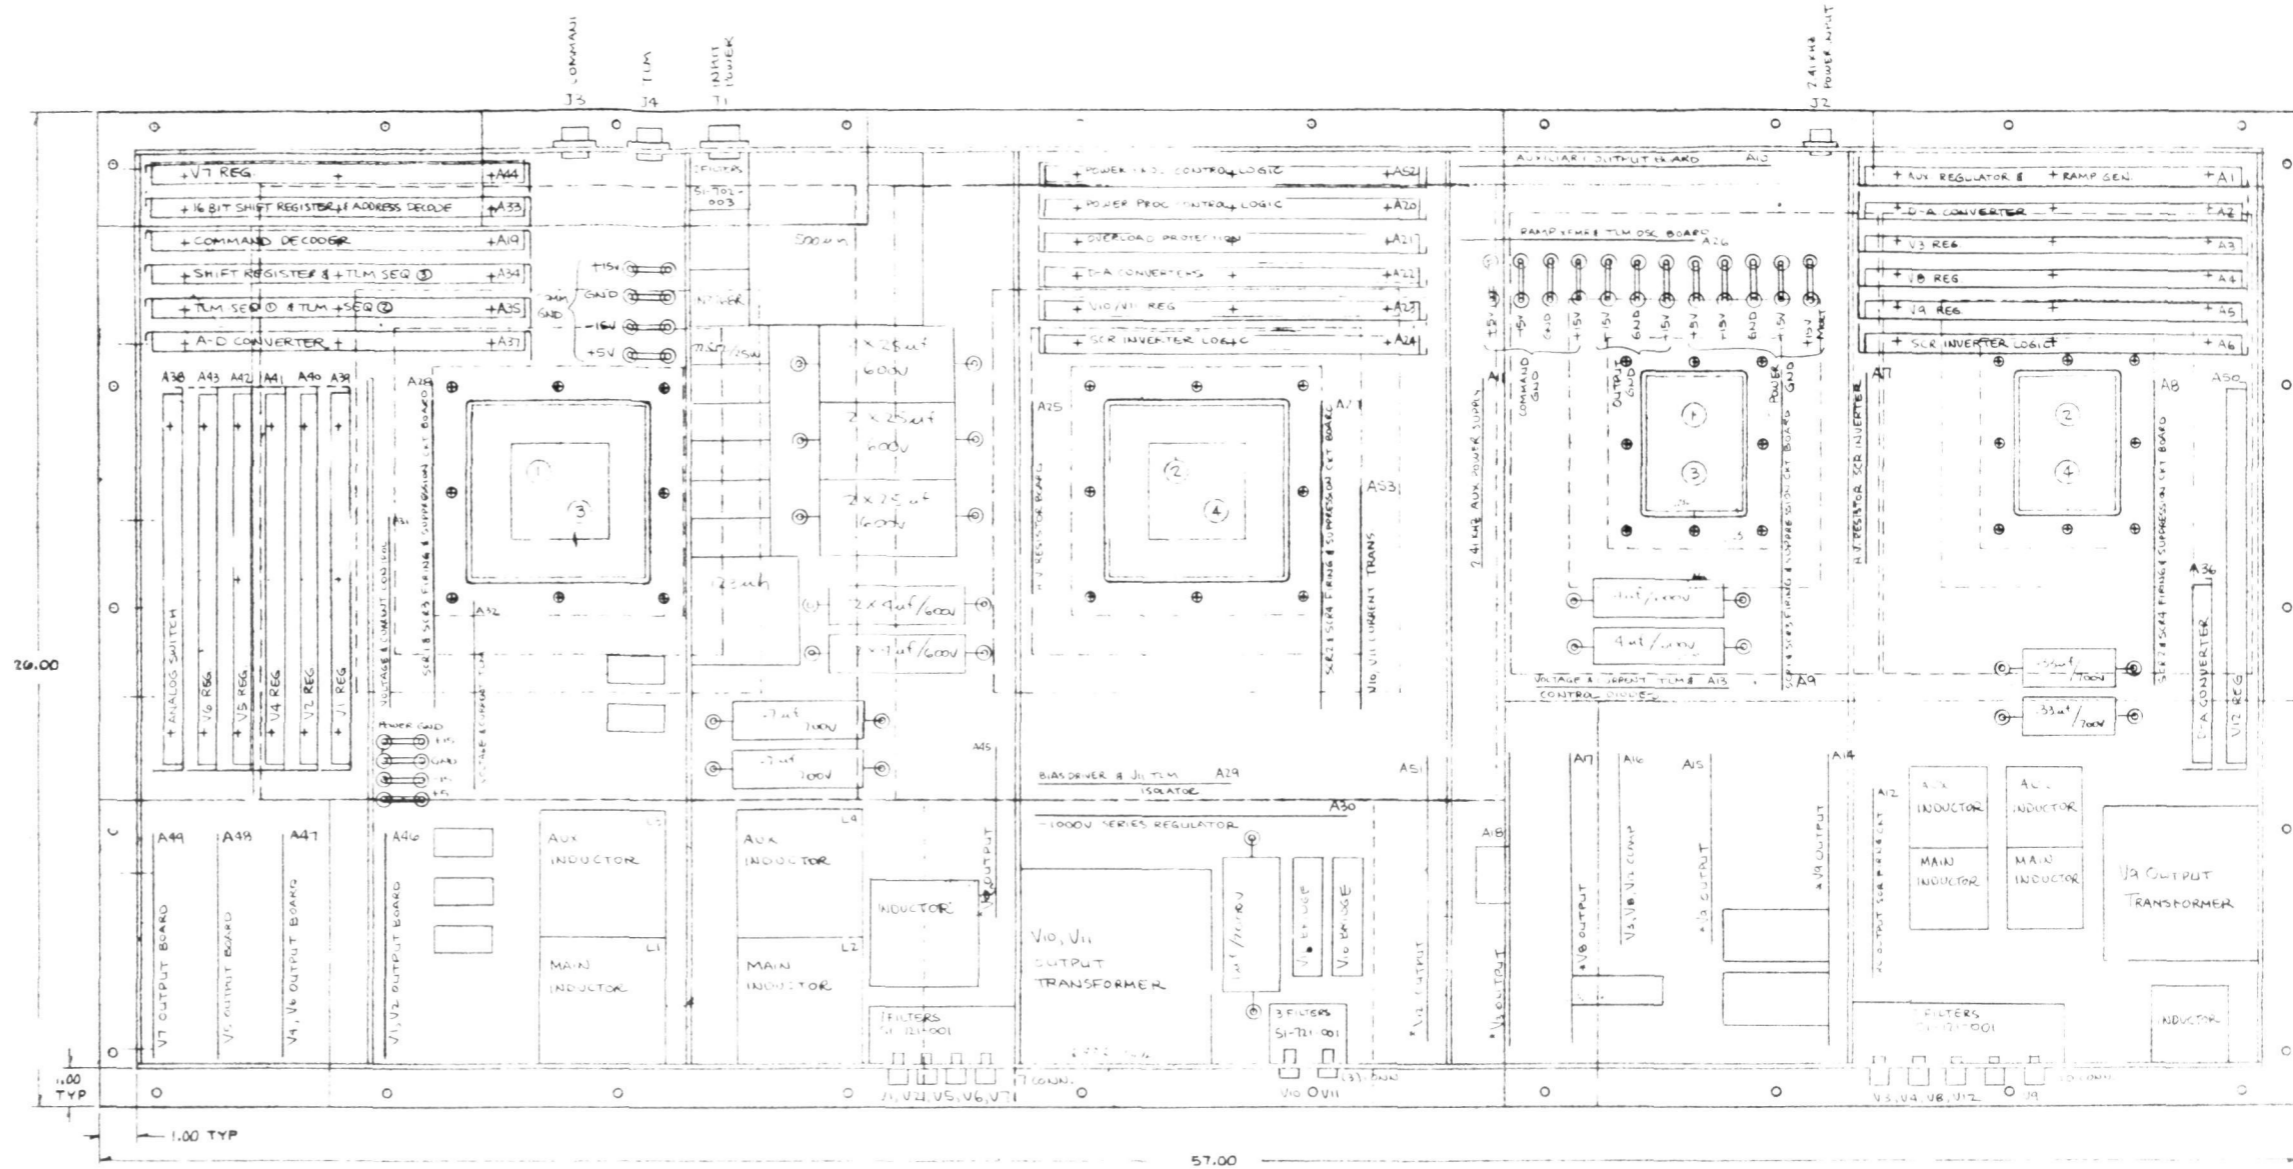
30CM ION ENGINE POWER PROCESSOR THERMAL VACUUM BREADBOARD LAYOUT
